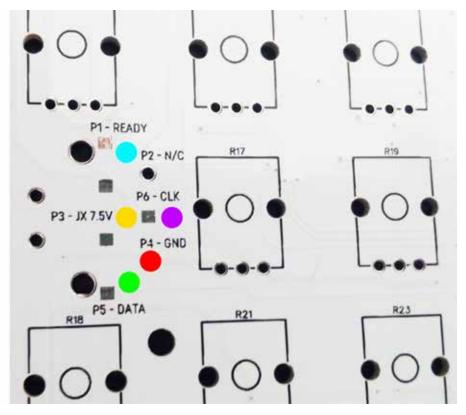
PG-800 Mini Wiring points (Top view of PCB)
